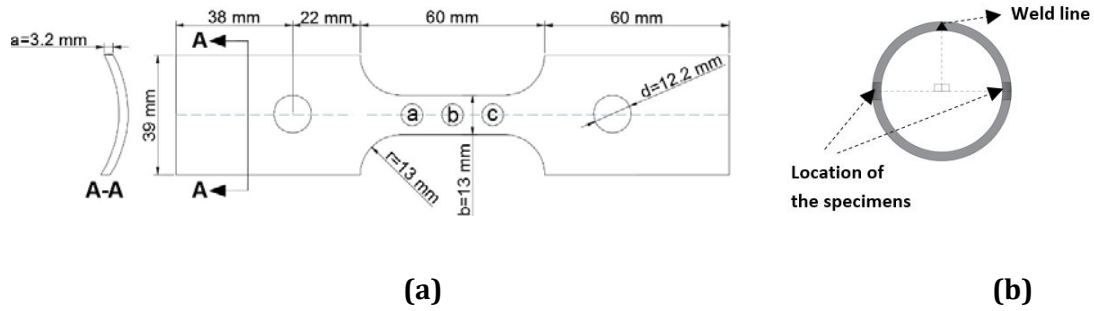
a) Geometry and b) location of test specimens sectioned from the steel tubes
